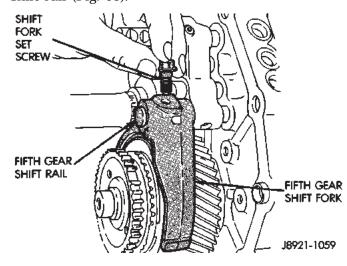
Remove Fifth Gear Shift Fork Retainer Bolt
